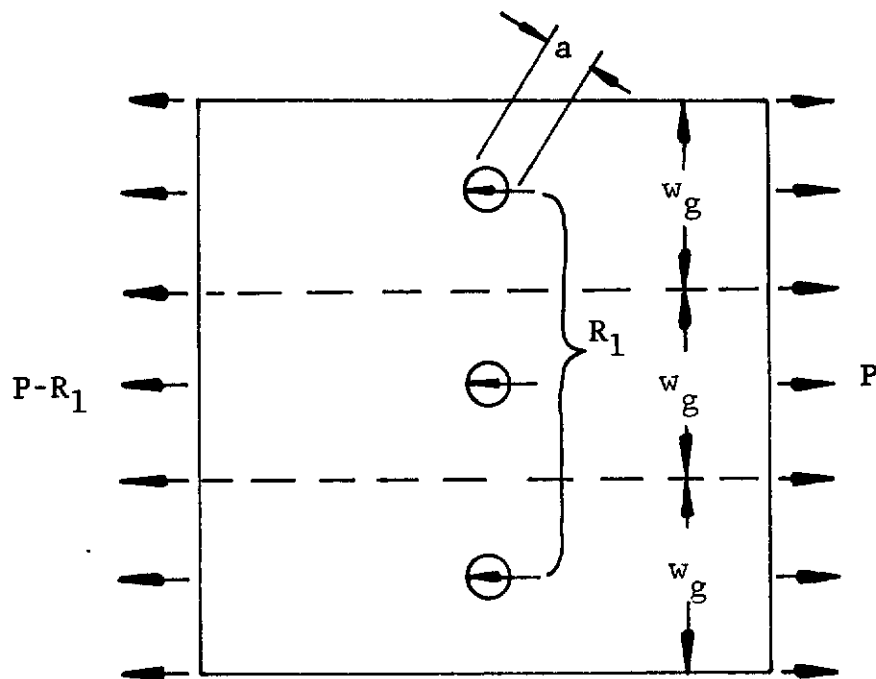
STRIP METHOD OF RIVETED OR BOLTED PLATE JOINT ANALYSIS, AFTER SCHENKER (6.58)
